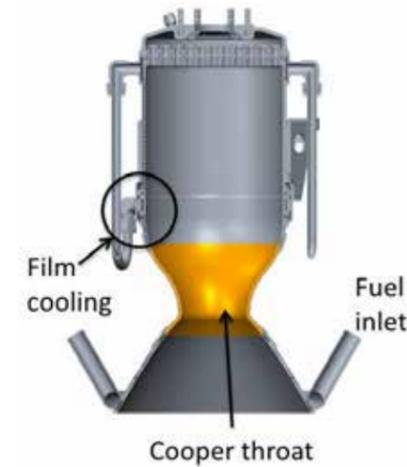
Thrust Chamber Assembly (TCA) cycle design
